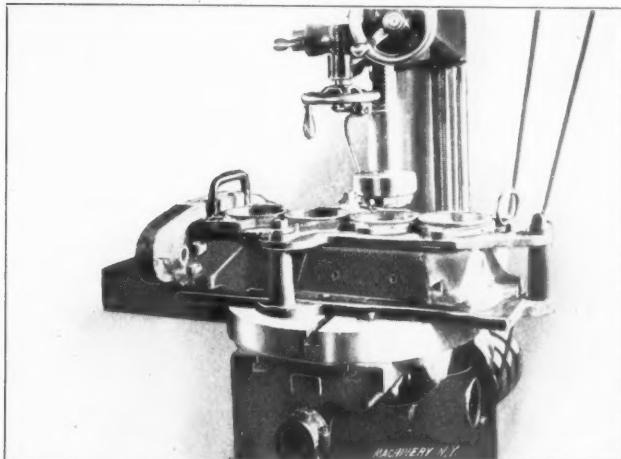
Jig and Boring Tool for Boring out Cylinder Holes in Crank Case.
